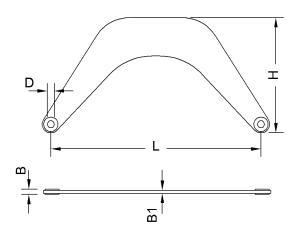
Dimensions of the mid-point suspension spacer bracket on the main boom after the attached reducing piece
